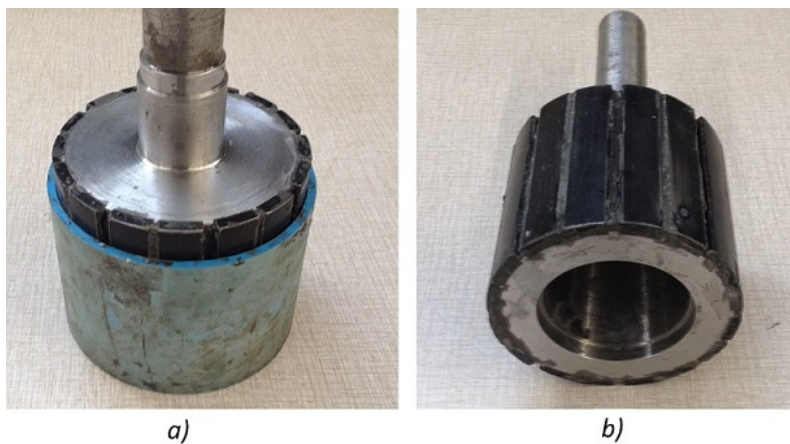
(a) HS PMs assembled with PVC tube around the assembly, (b) completed HS rotor with magnets
